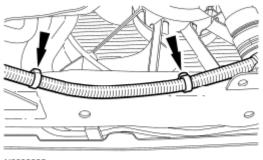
Locating EPAS System Wiring Harness Pin-Type Retainer Courtesy of FORD MOTOR CO.
